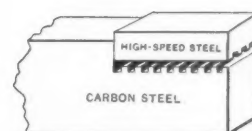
Grooving High-speed Steel Bit and Carbon Steel Shank for welding
